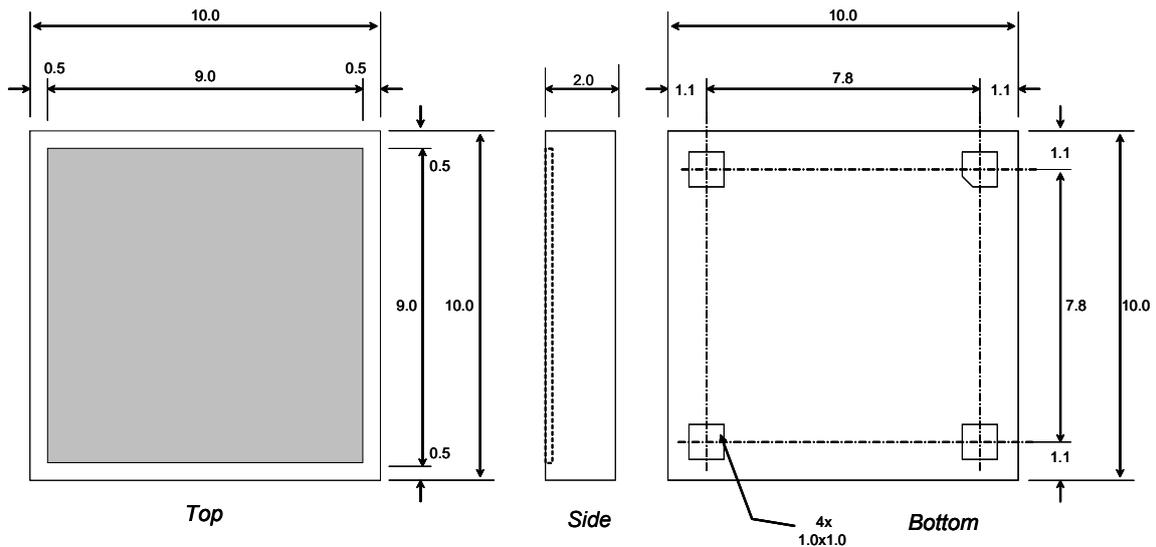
Mechanical Drawing (all dimensions are nominal and in mm)
